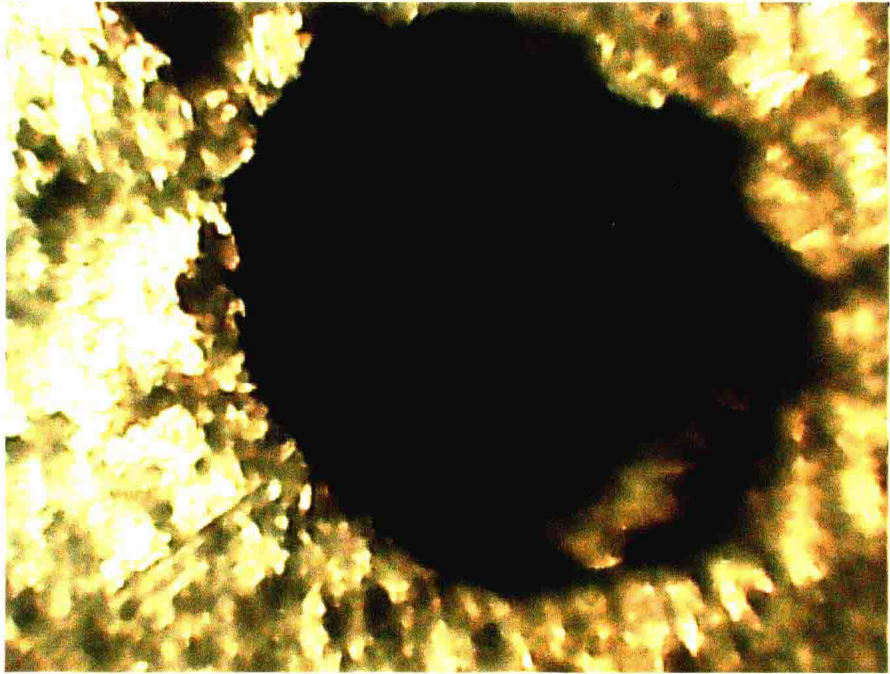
A Blow hole defect in an aluminum casting at 100× magnification
